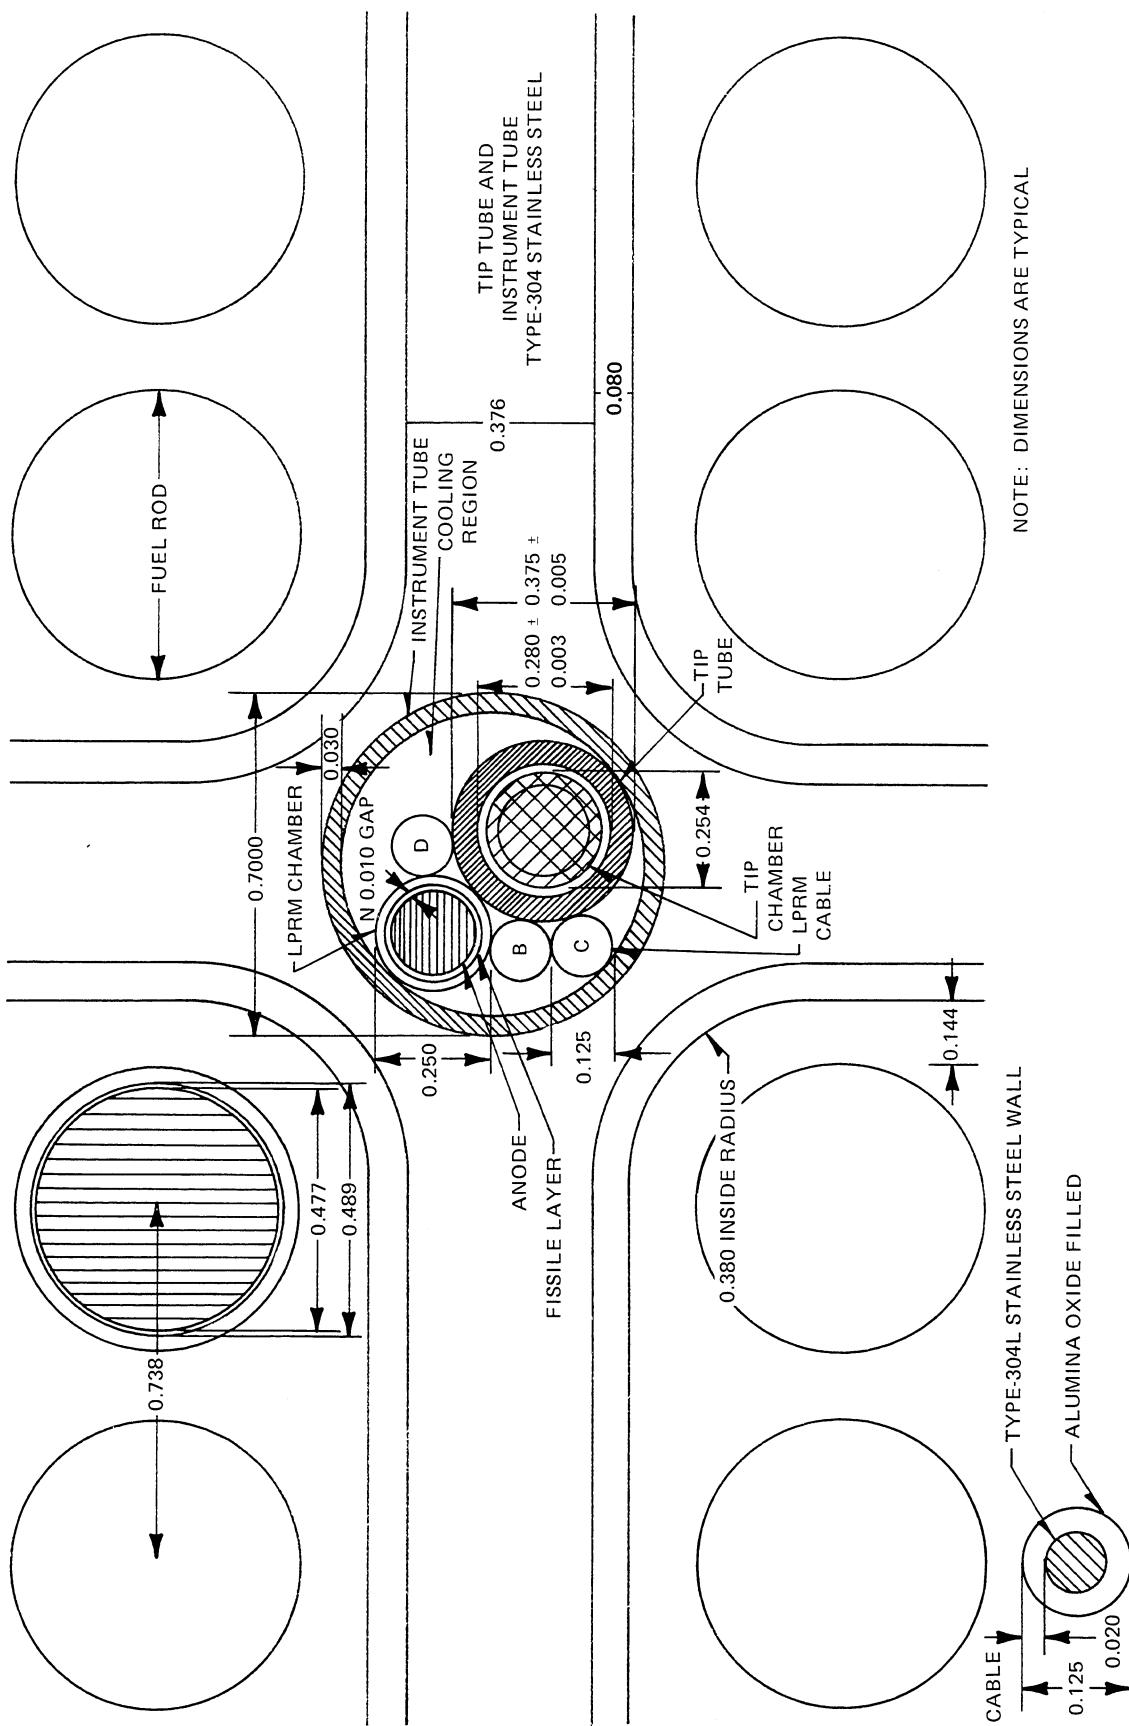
TIP/LPRM In-Core Assembly Cross Section
